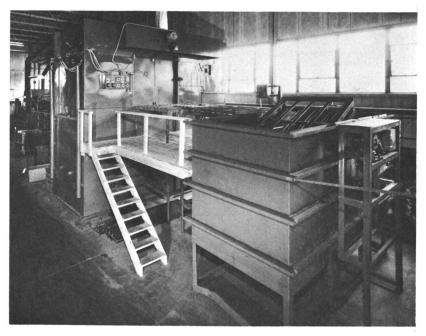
76 inch diameter E. B. Blue Co. rotational casting machine
